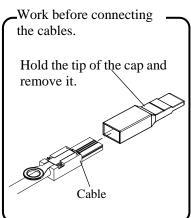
Connection of cable (Option 1)
